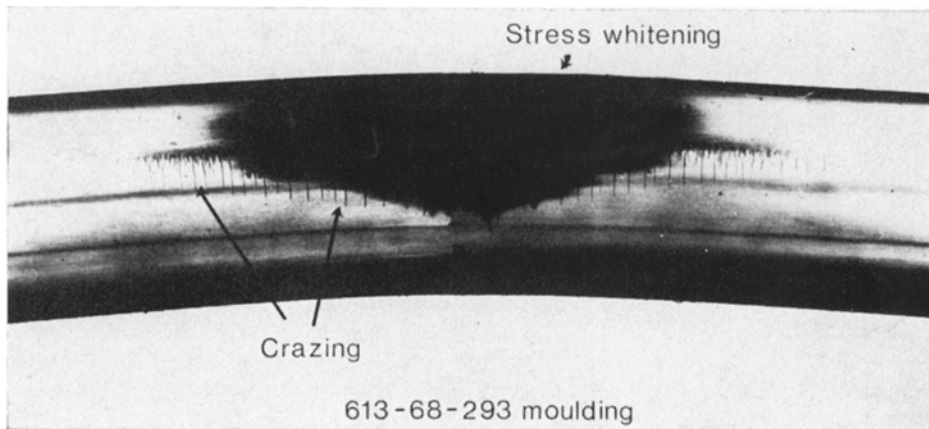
Using transmitted light, an enlarged view of the crazing and stress whitening for bend testing the bar moulded at 613-68-293. The position of the crazing is in that of region V.
